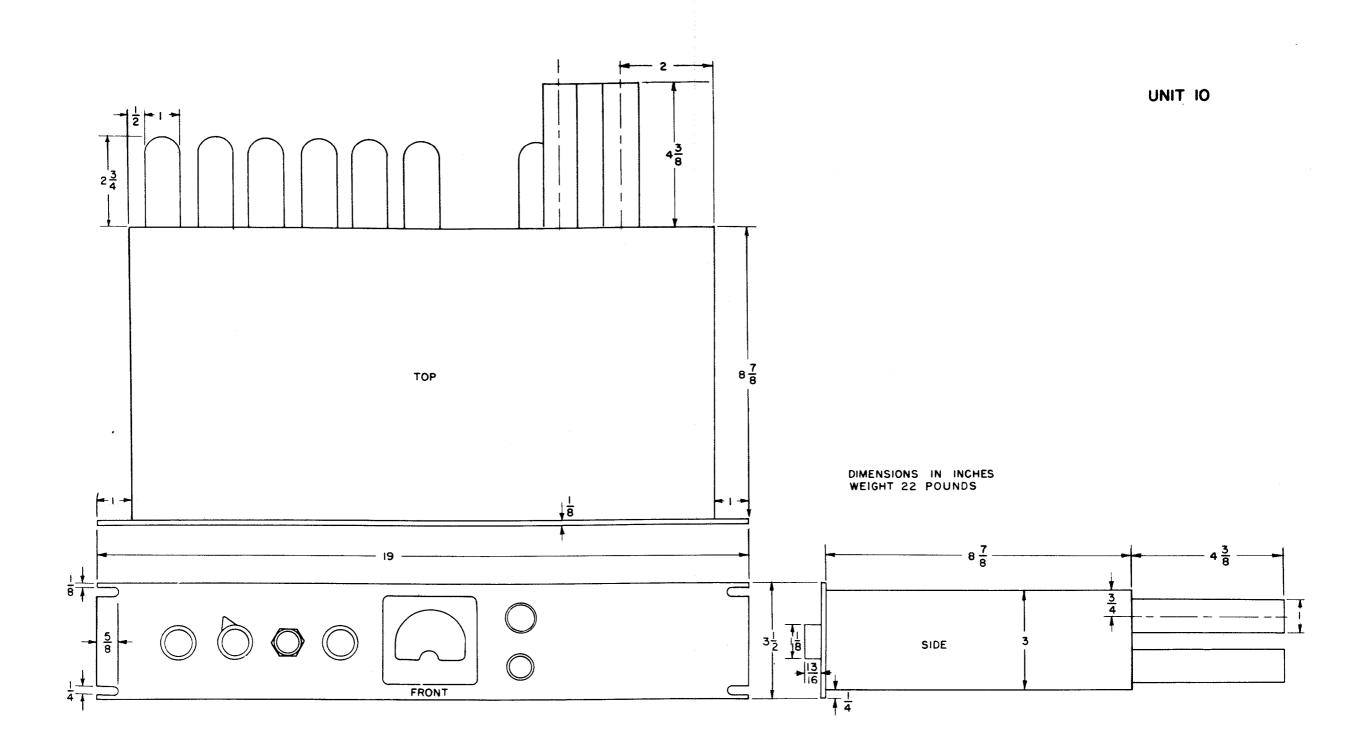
Keyer KY-79/UR, Outline Dimensions
